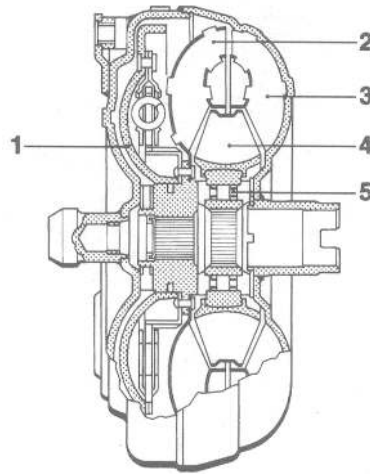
Cross section of a torque converter. 1 lockup clutch, 2 turbine, 3 impeller, 4 stator, 5 one-way clutch
